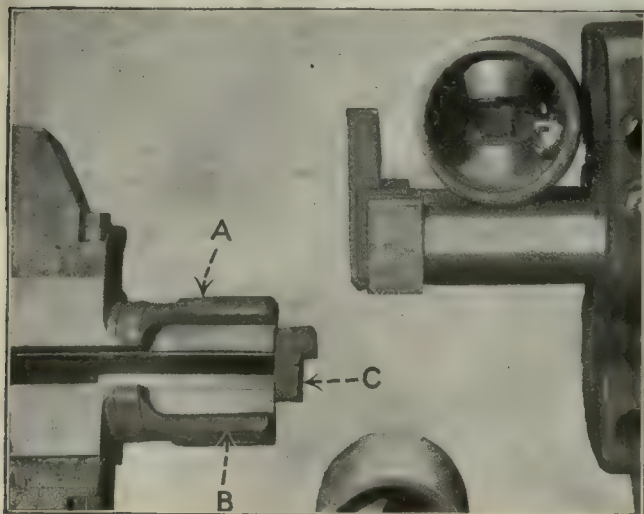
CHUCK AND TOOLS FOR TURNING PISTONS
